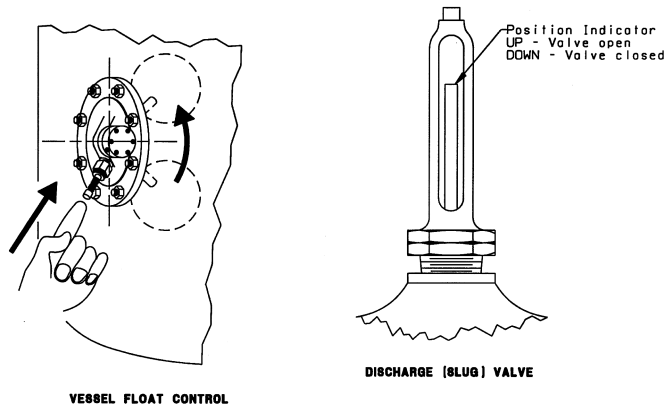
Operating the float control manual test mechanism. (Observe the fuel discharge valve position indicator.)
